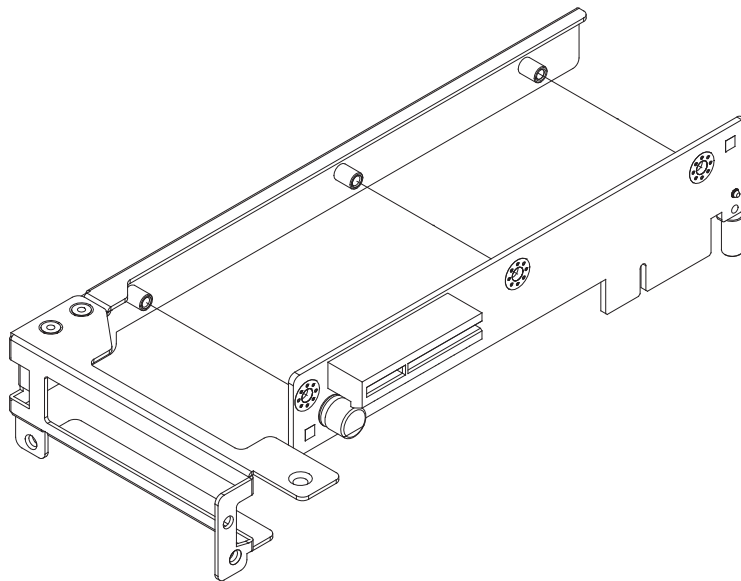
MR Module Assembly/MR 模块安装 /MR 模組安裝
